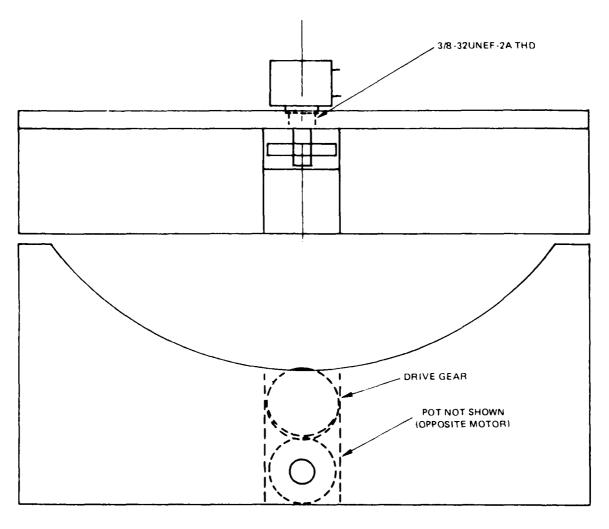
Platform drawing sheet 7: outer potentiometer mount.
